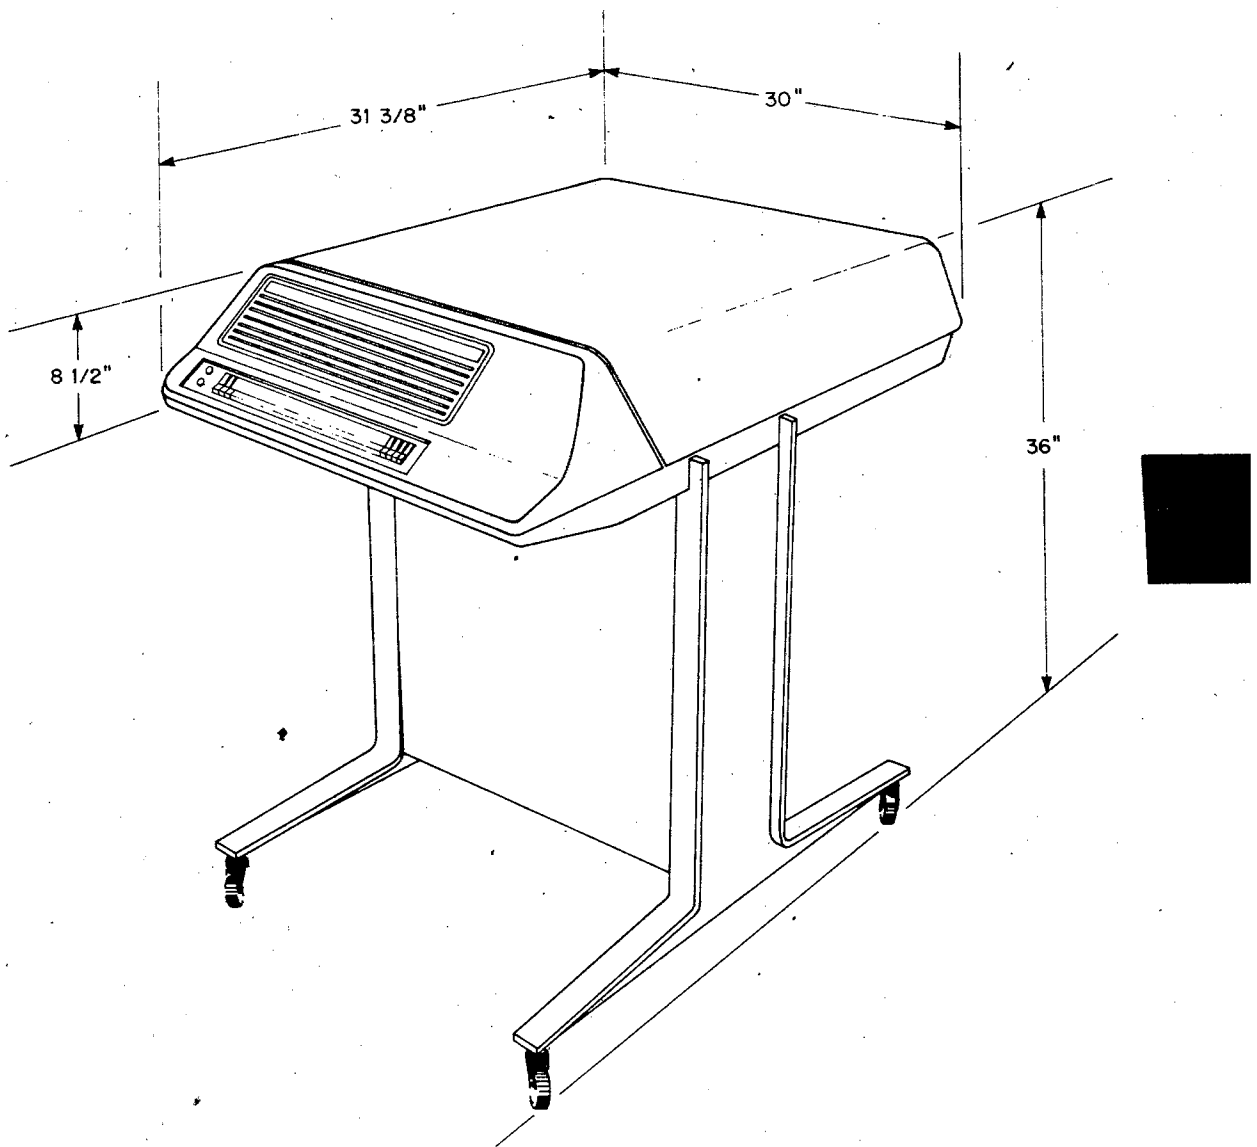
Pedestal Mounted PDP-8/I Dimensions
